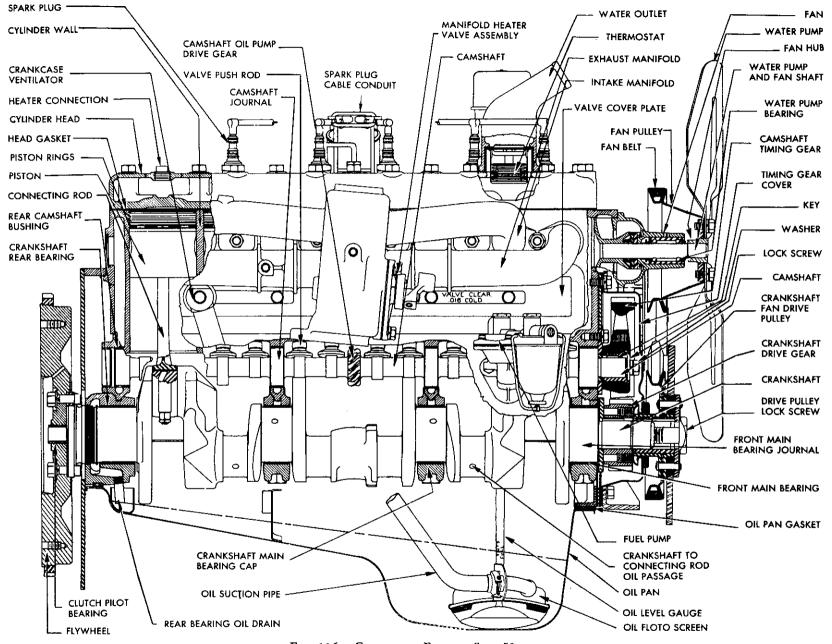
CHAMPION ENGINE SIDE VIEW
